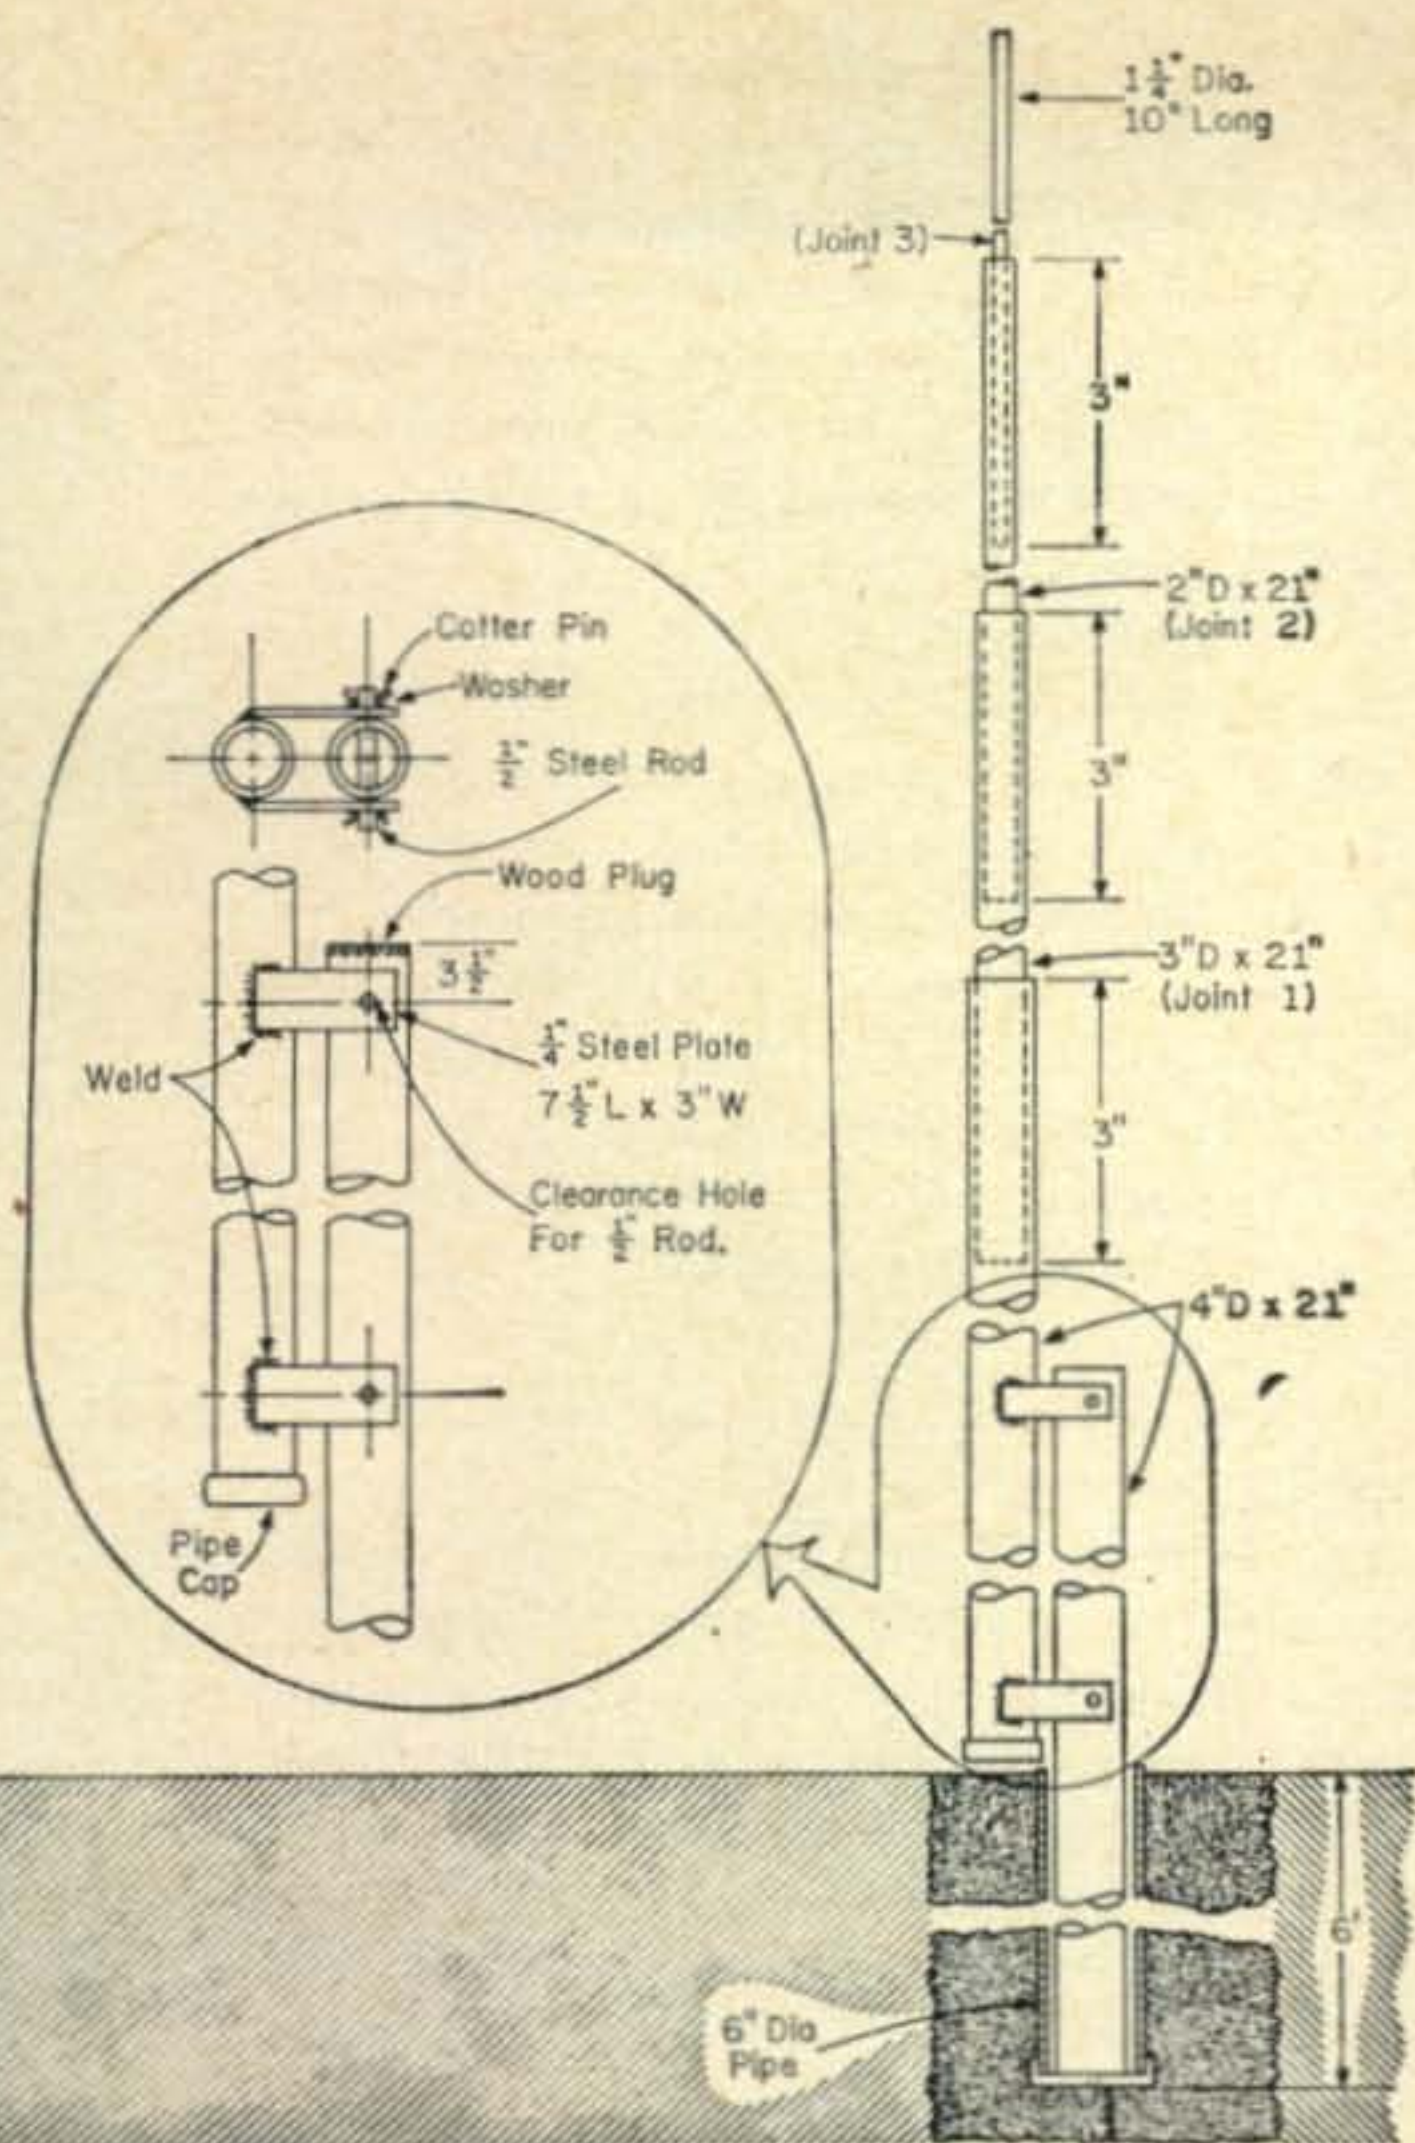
General layout of the self supporting mast. The 6" diameter pipe is set flush with the ground and, with the concrete mix, provides a foundation suitable for winds up to 75 m.p.h. Details of the hinge construction are shown in the inset. A wooden plug is inserted in the top of the 4" gin pole.
